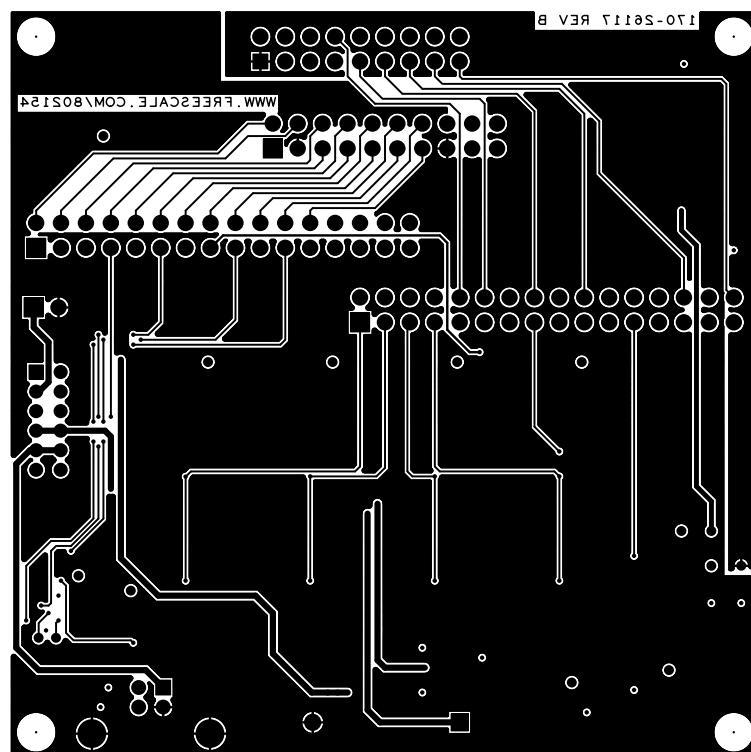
1323x-REM PCB Layout (Bottom View)
